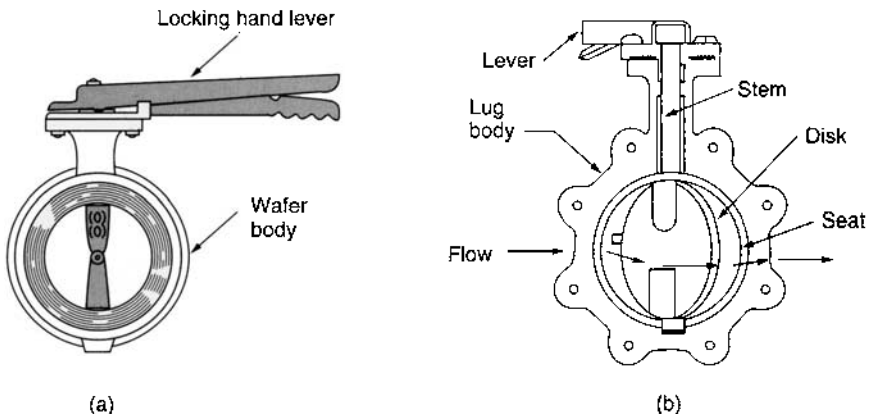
Butterfly valves. (a) Wafer body; (b) lug body.
